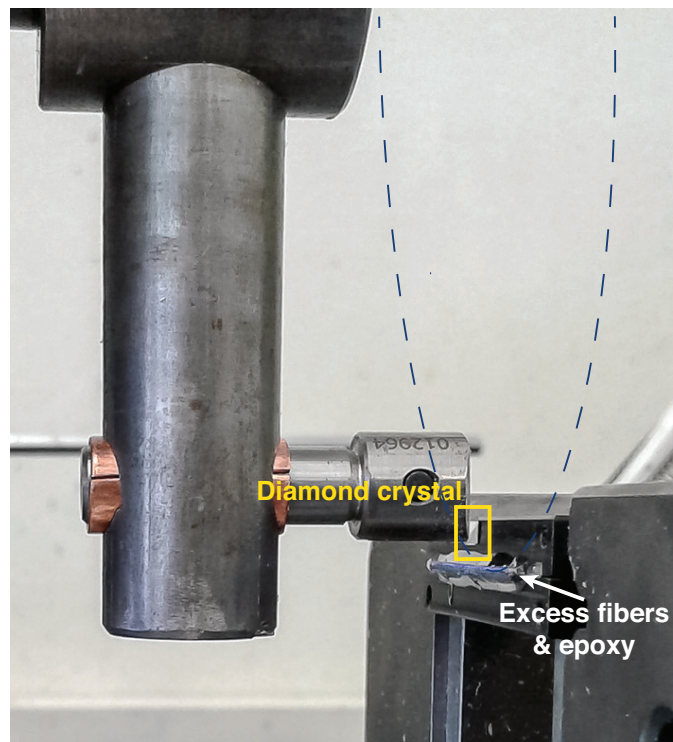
A diamond tipped tool installed on a CNC machine with a ribbon surface being machined.
